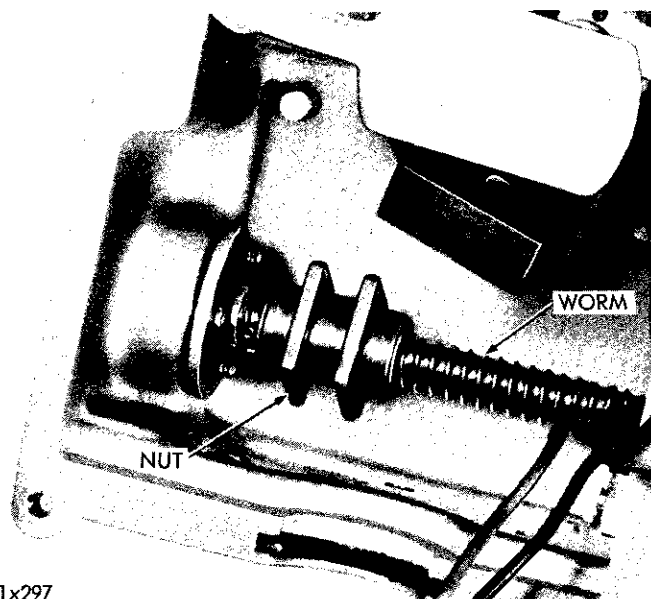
Assembling the Drive Worm and Nut Assembly in the Housing
